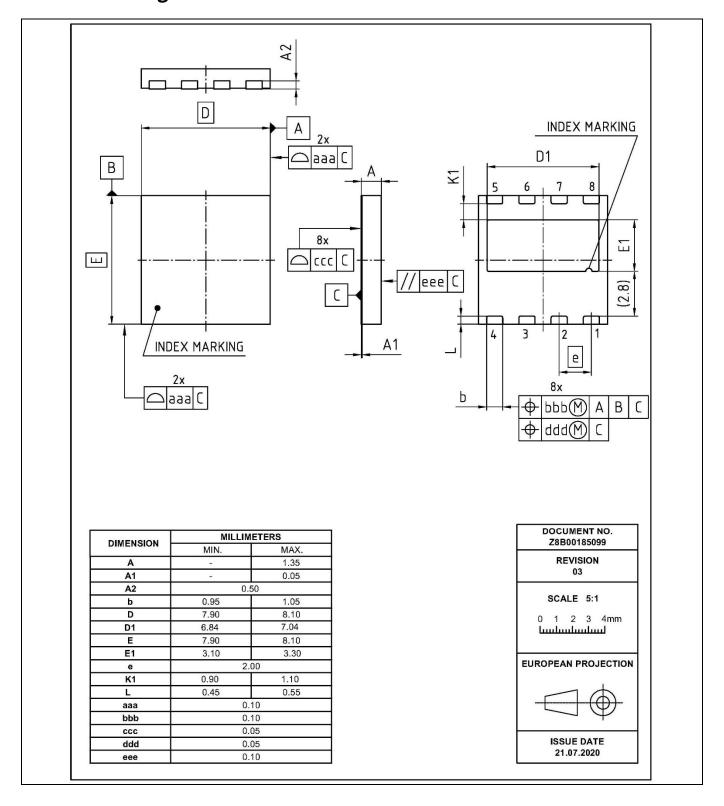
PG-LSON-8-1 Package Outline, dimensions (mm)
